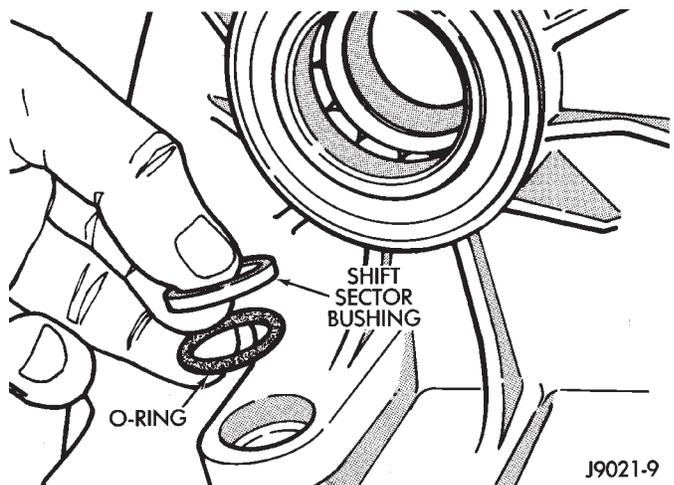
Removing/Installing Sector Shaft Bushing And O-Ring
